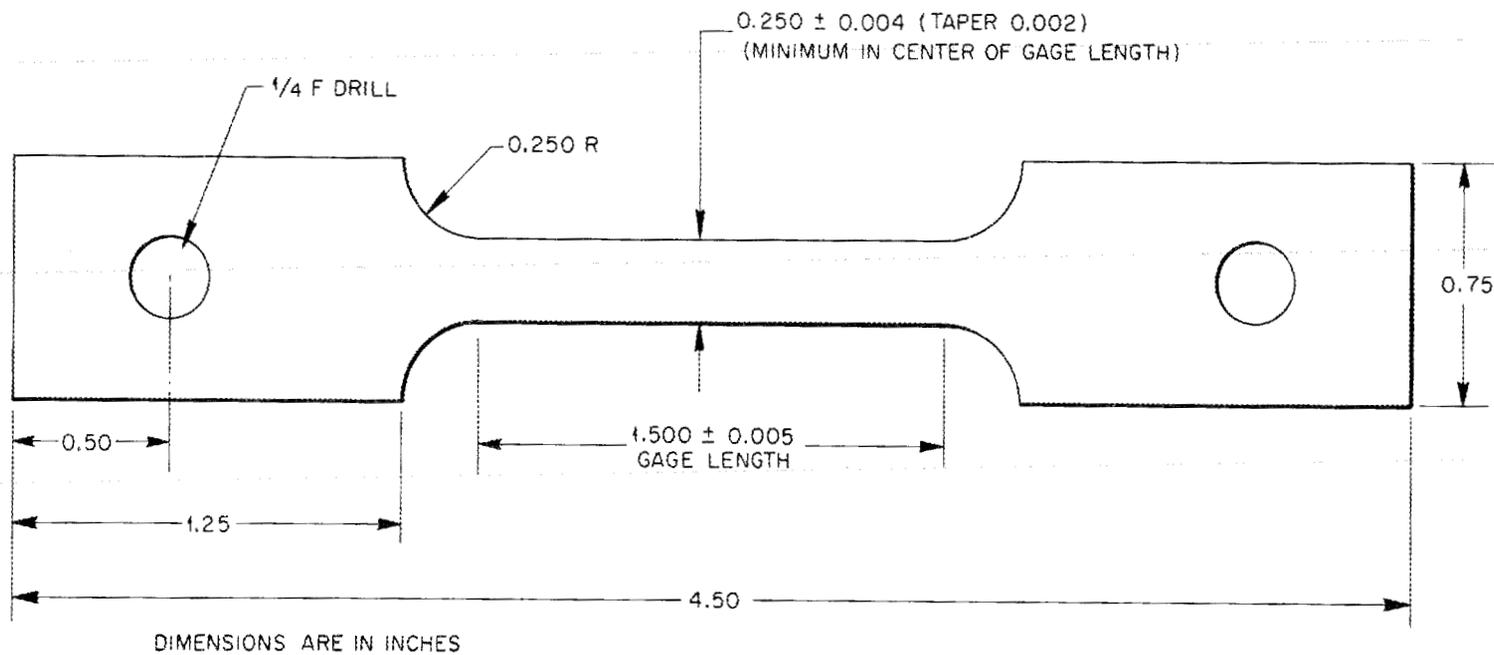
Type 347 Stainless Steel-UO₂ Tensile Sheet Specimen.
